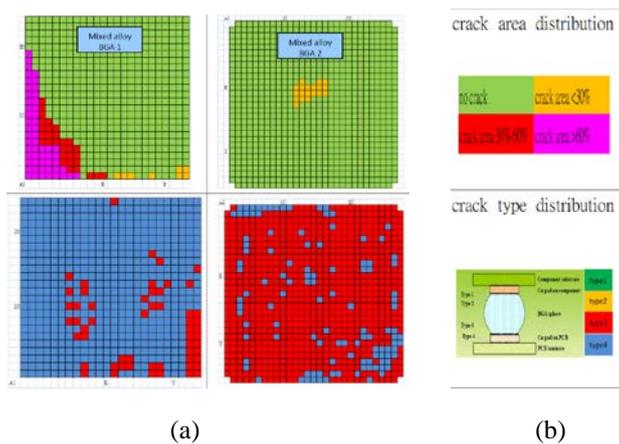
Solder crack area and crack type statistic (a) and Crack area crack type distribution definition (b)
